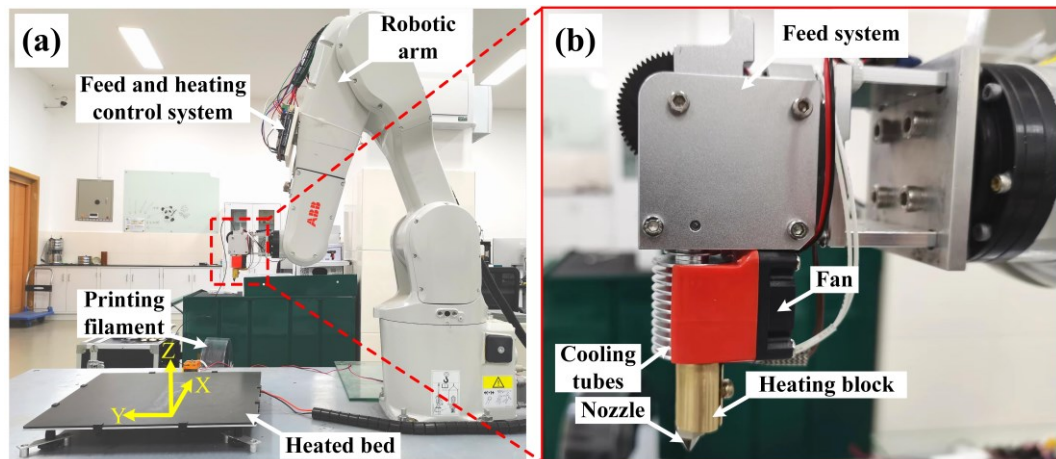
Robot arm 3D printing equipment: (a) 3D printing equipment and printing module mounted on a robot arm, (b) printing nozzle and heating module.
